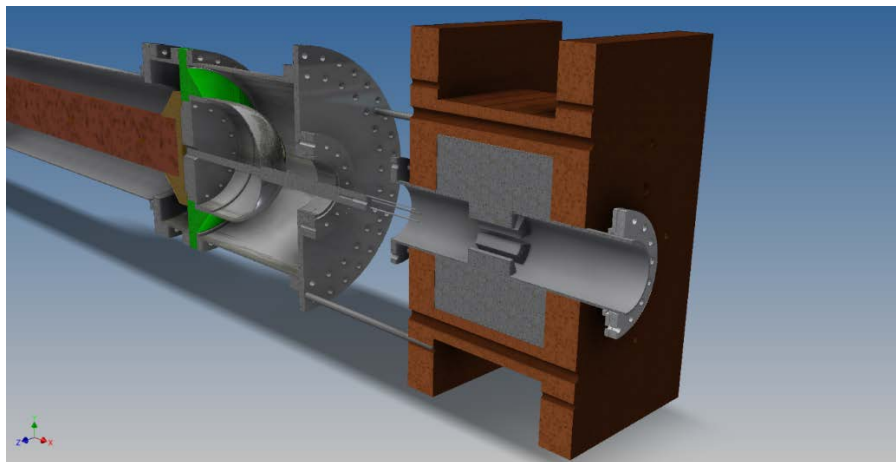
Assembly drawing of the permanent magnet and compact MDO onto PULSERAD accelerator.
